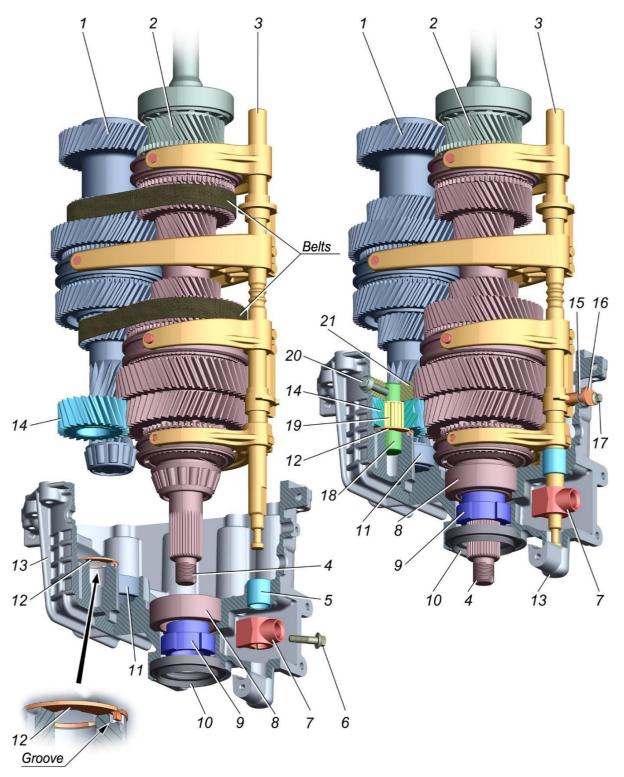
Shafts and gears installation to the rear housing: 1 - countershaft assembly; 2 - primary shaft assembly; 3 - gear-shift mechanism; 4 - secondary shaft assembly; 5 - linear motion ball bearing; 6, 17, 20 - bolts; 7 - gear engagement stem head; 8 - secondary shaft taper bearing outer race; 9 - speed sensor rotor; 10 - collar seal; 11 - countershaft taper bearing outer race; 12 - reverse gear thrust washer; 13 - rear gearbox housing, 14 - reverse idler gear; 15 - sealing ring; 16 - stop dog; 18 - reverse idler gear axis; 19 - radial roller bearing without rings; 21 - axis bushing.
